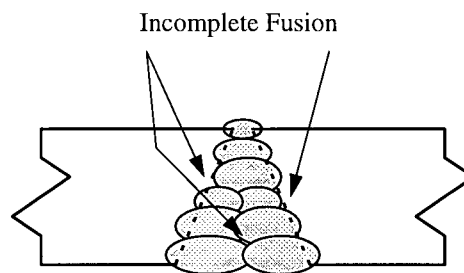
Multipass Weld with Incomplete Fusion
